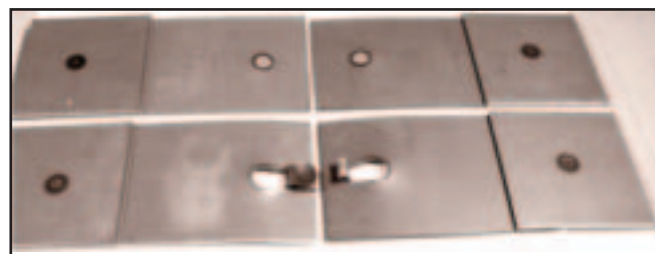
Interfacial fracture (top sample) in TRIP steel, where the fracture occurred through the weld nugget, and full button pull out (bottom sample) in dual-phase steel, where the weld nugget was intact. The spot welds on both ends of each sample were made to attach shims for tensile testing.
